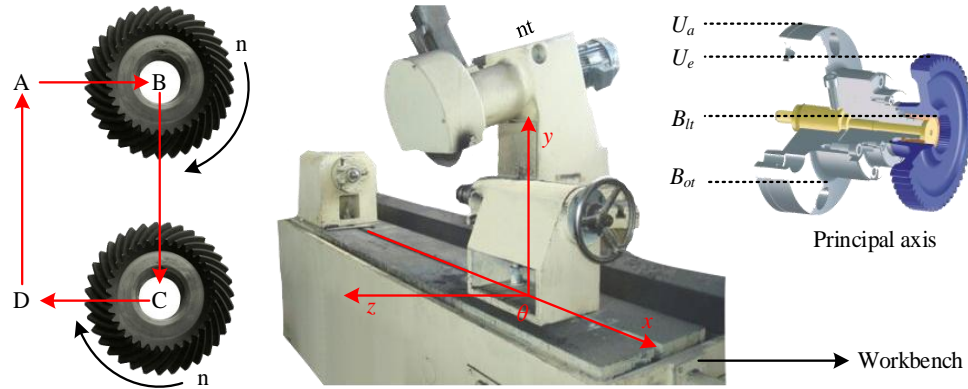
Cutting status of gear hobbing machine after adding constraint conditions.
